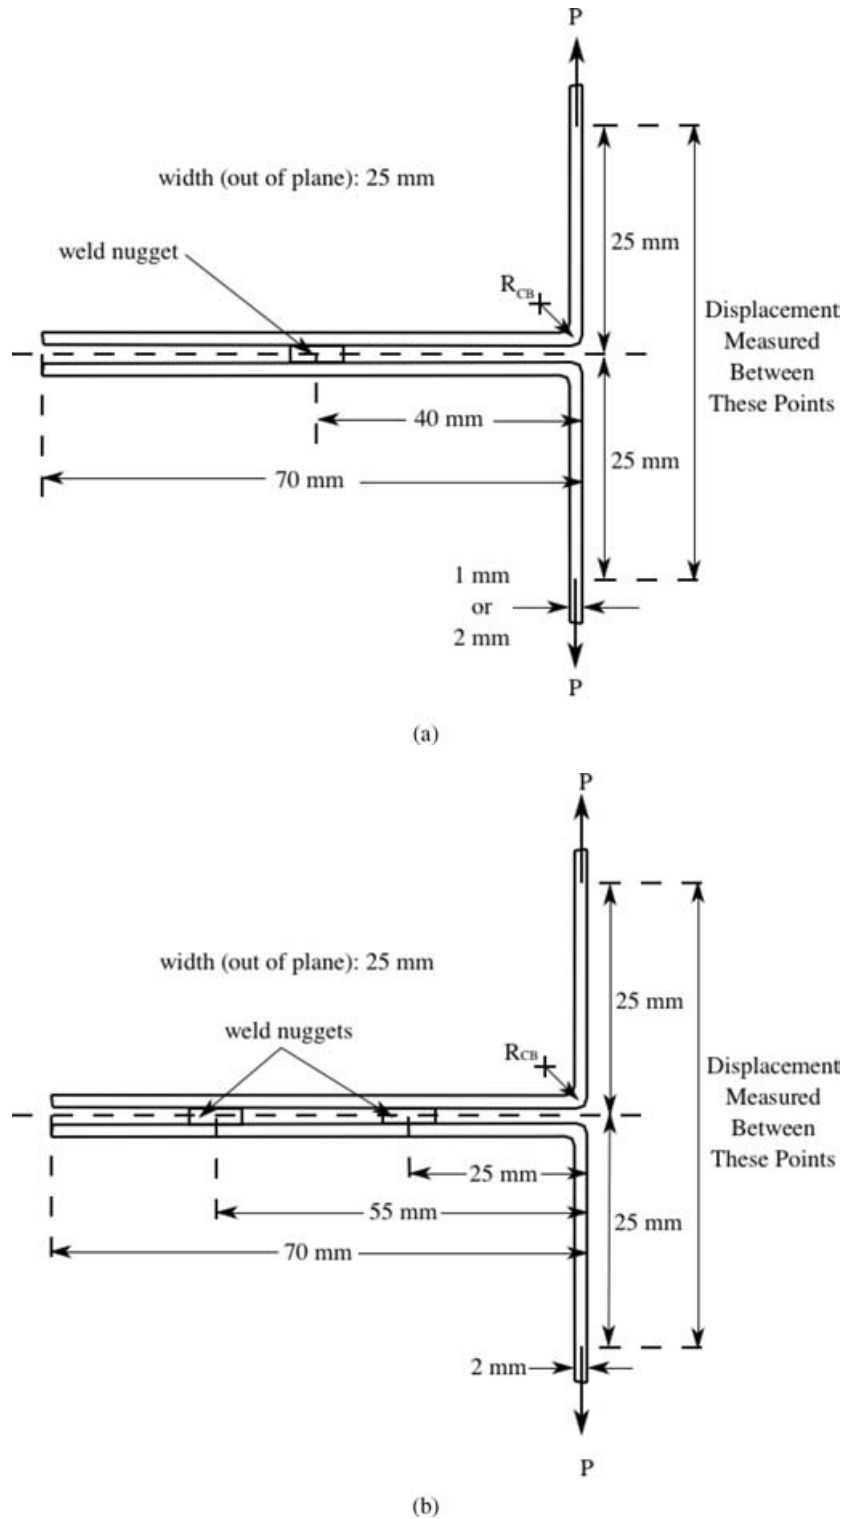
Geometry and dimensions for the (a) T-peel specimens with 1 spot-weld and (b) T-peel specimens with two spot welds used to verify the cohesive-zone parameters. The curvature, R_{CB} , was 2-mm for the 1-mm thick aluminium alloy, and 5 mm for the 2-mm thick alloy.
